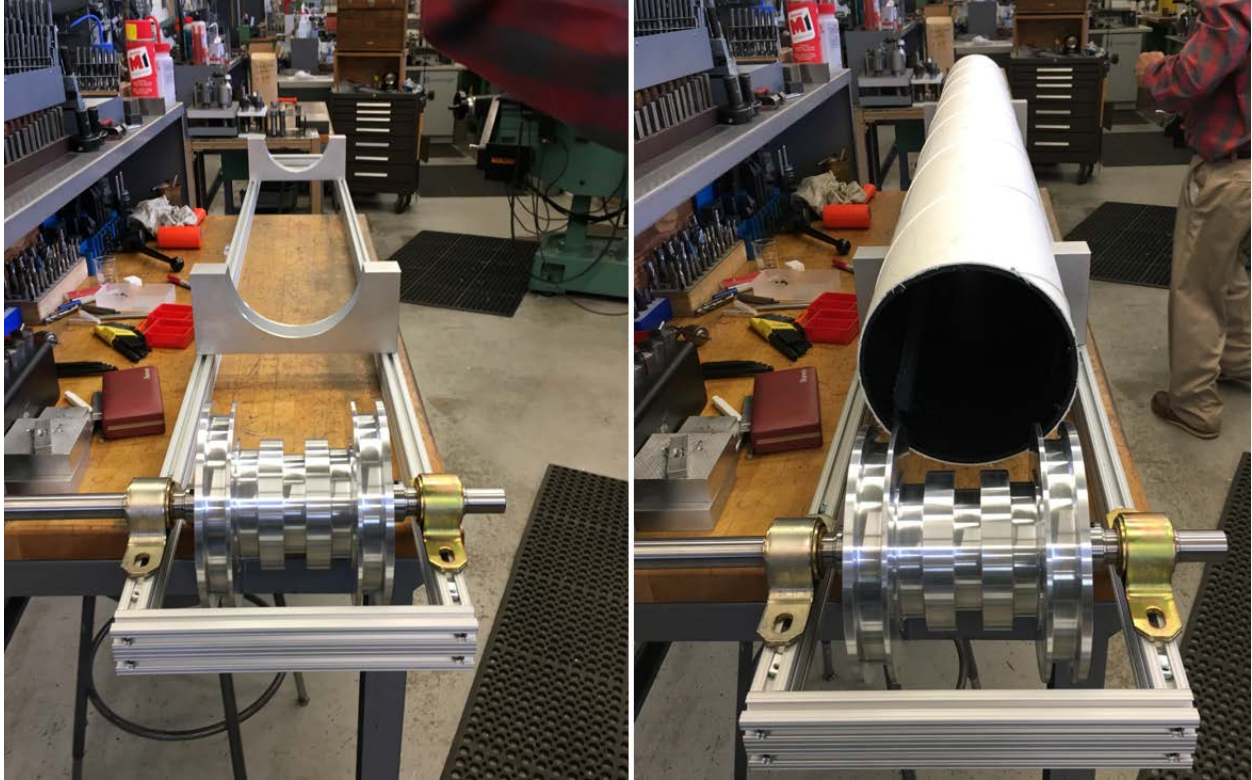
Aluminum machined top section of operating platform with and without 7 ft. HDPE pipe
